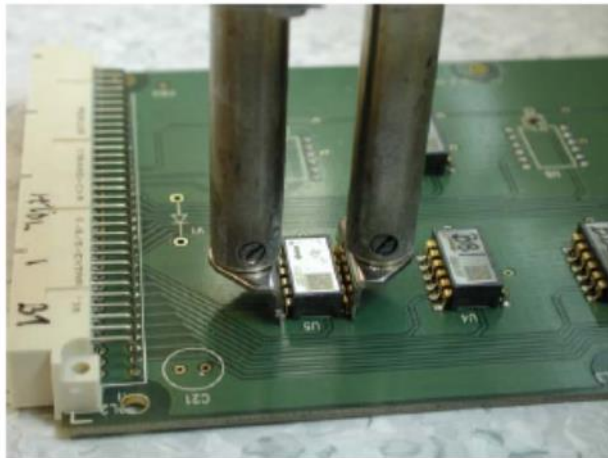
Tool head is carefully pressed around component and kept in this position for few seconds.
